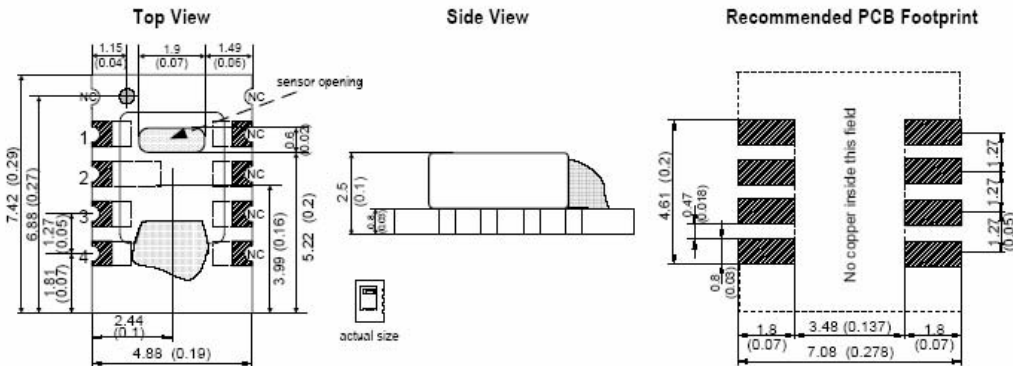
SHT1x drawing and footprint dimensions in mm (inch)
